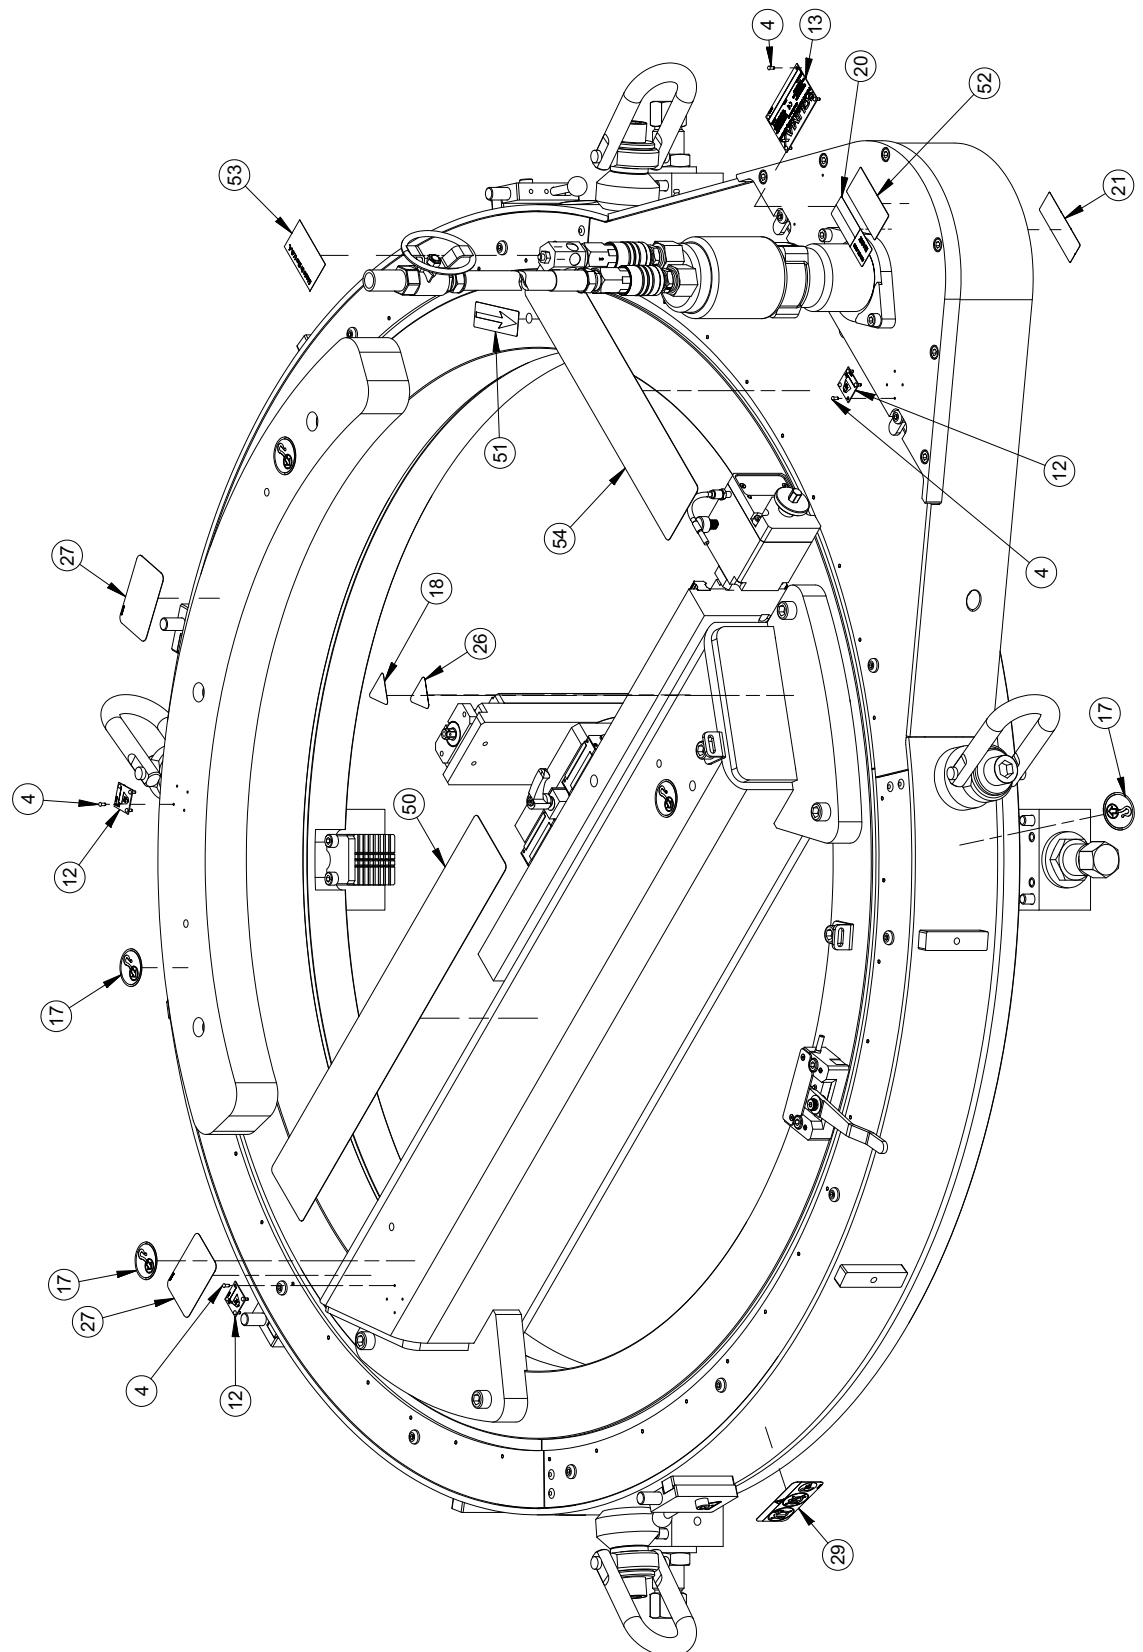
ODF40 SPEED FACER LABELS ASSEMBLY (P/N 86870)
